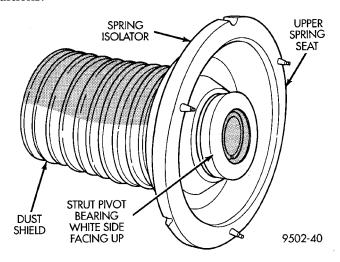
Upper Spring Mount And Isolator Assembly Components
